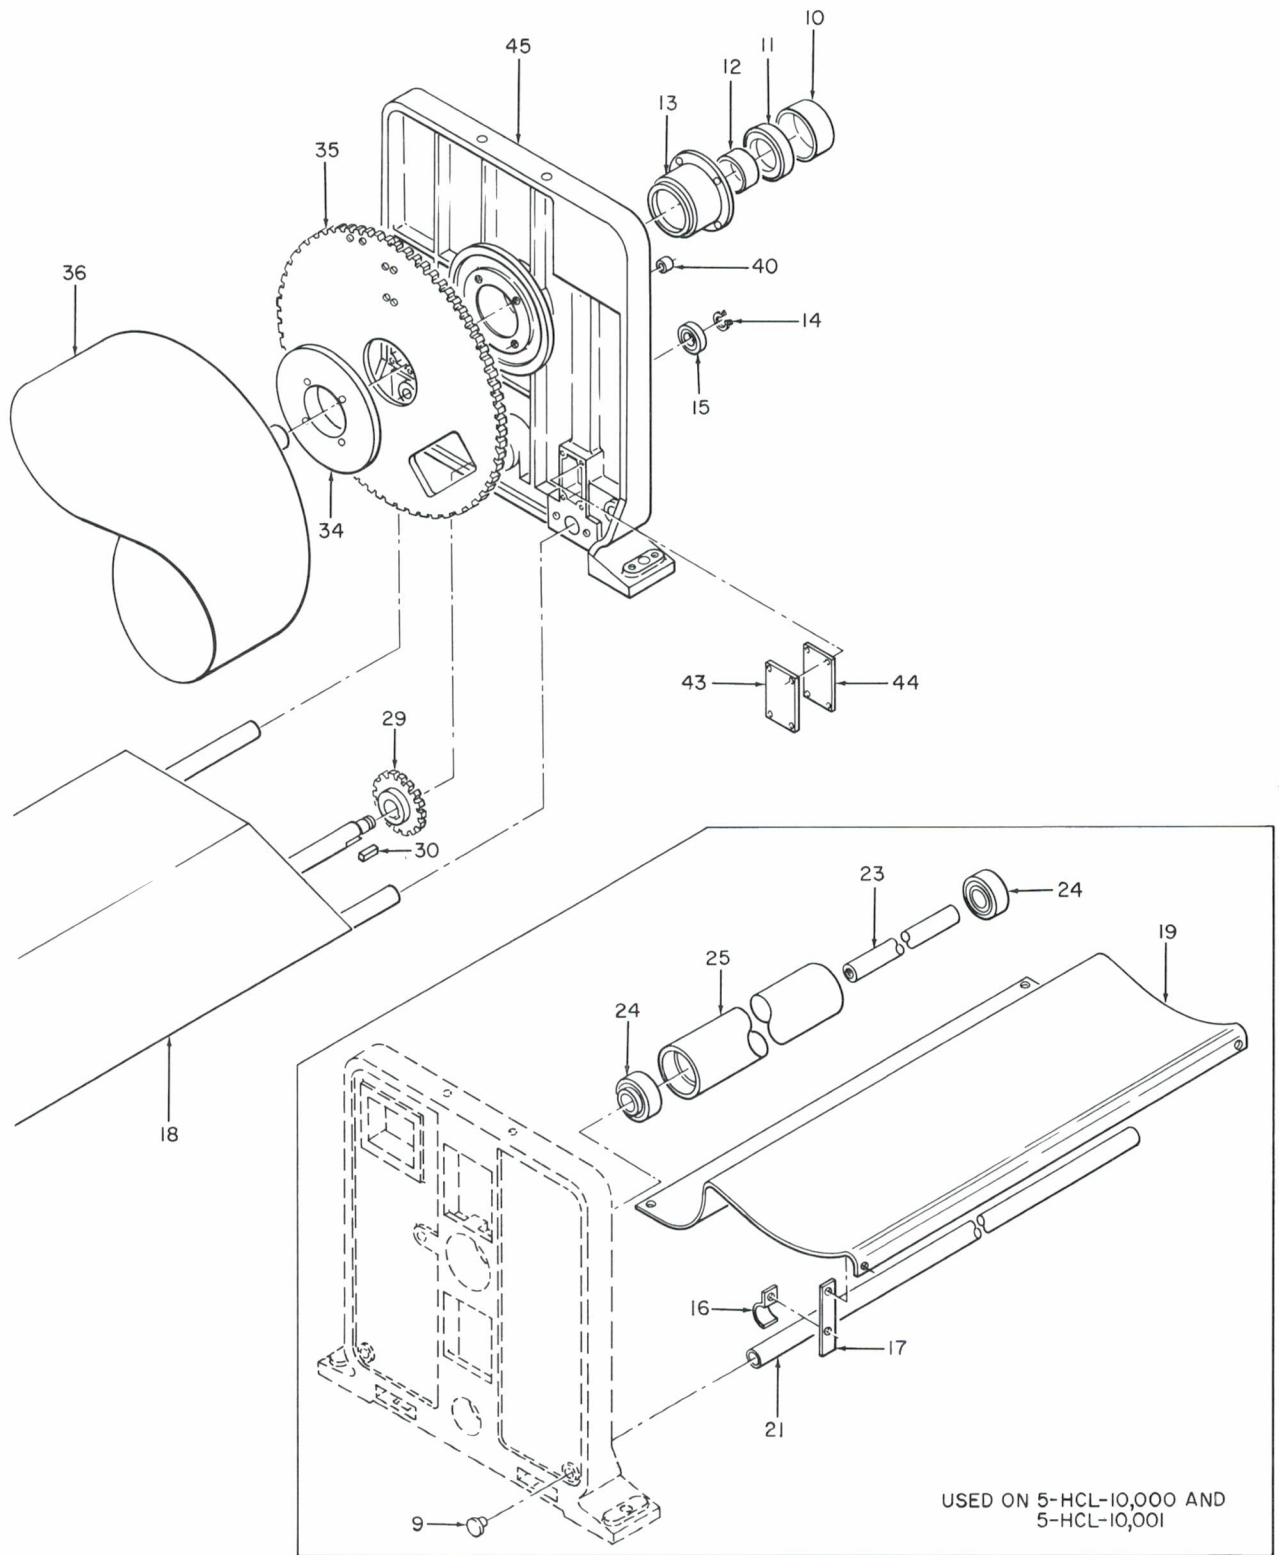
Frame and Drum Assemblies (Sheet 2 of 2)
